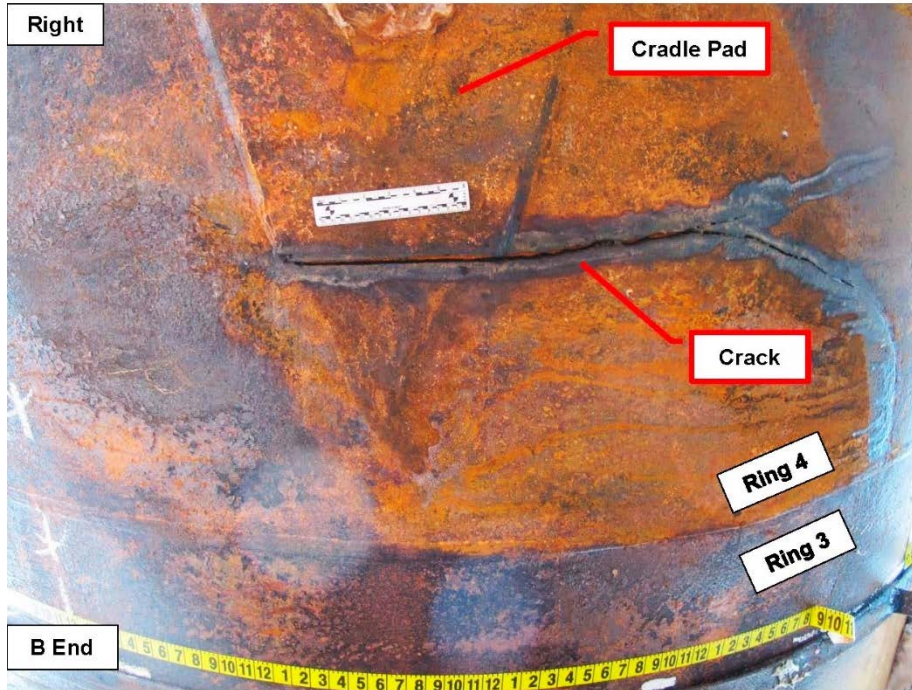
Exterior surface of tank car AXLX1702 showing a circumferential crack inboard of the cradle pad, September 1, 2016.
